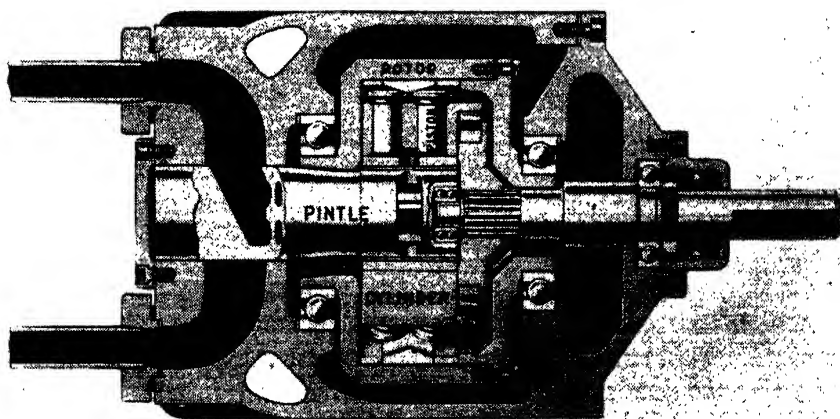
Radial-piston fixed-stroke motor. (Courtesy of The Oilgear Company.)
